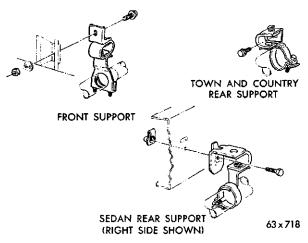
Exhaust System Supports (TC-1, TC-2 and TC-3)
